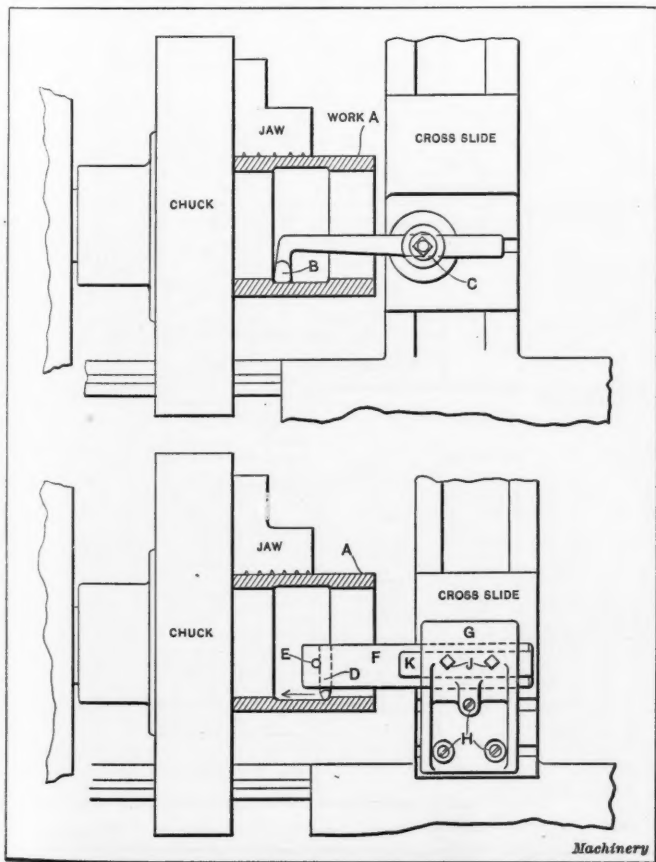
Two Simple Types of Recessing Tools for the Engine Lathe
